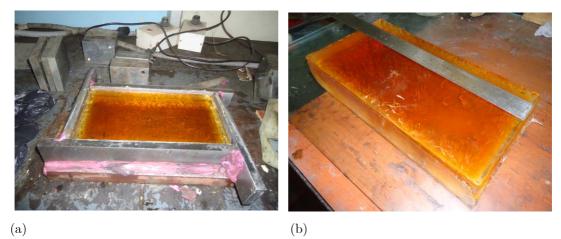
Casting of epoxy resin block using metal mold: (a) resin in mold while curing, (b) Cured resin block
